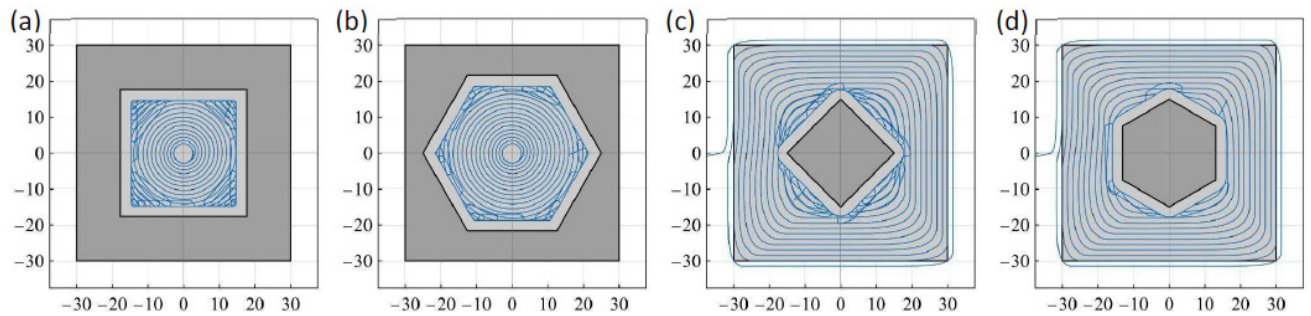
The adaptive milling tool paths: (a) squared shape pocket; (b) hexagon-shaped pocket; (c) square-shaped island; (d) hexagon-shaped island
